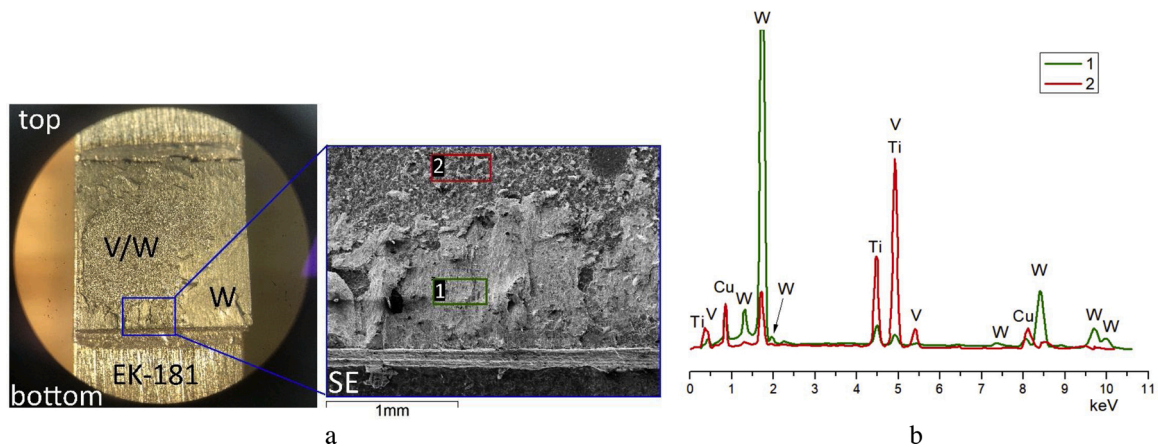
Fractography analysis of the brazed joint EK-181/Cu-50Ti/V/Cu-50Ti/W obtained using brazing mode N^o 1 after thermocycling.
